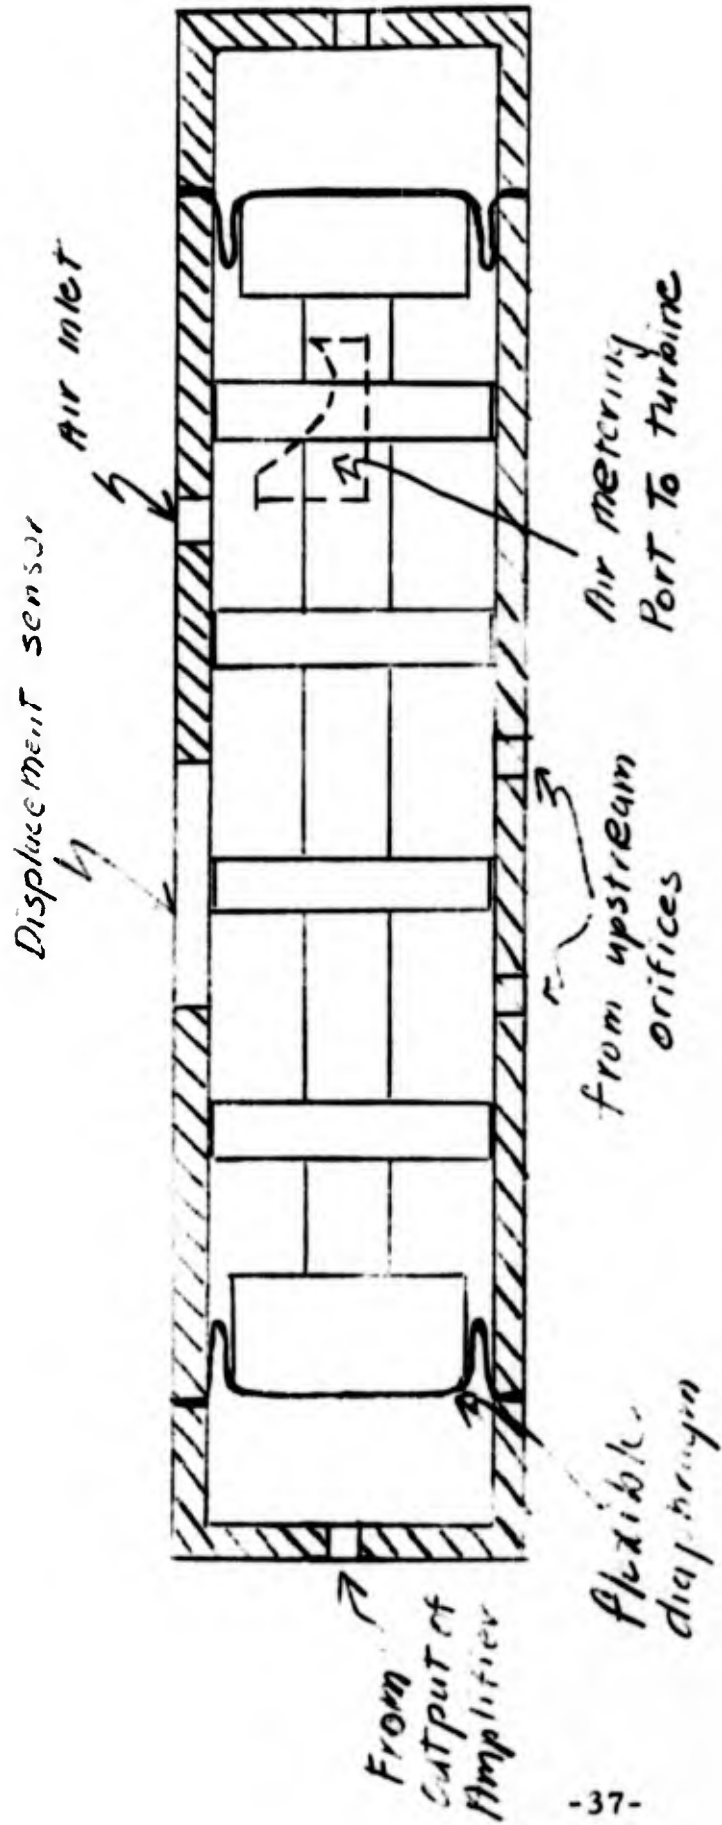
Cutaway Sketch of Actuator Assembly
